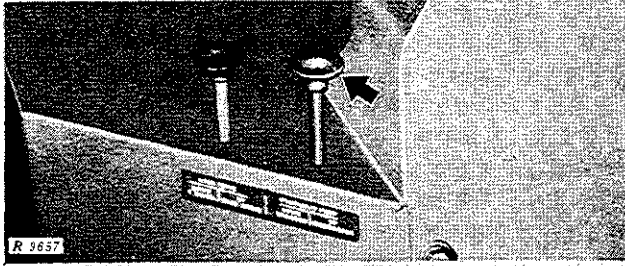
Hydraulic Pump Disconnect Knob
